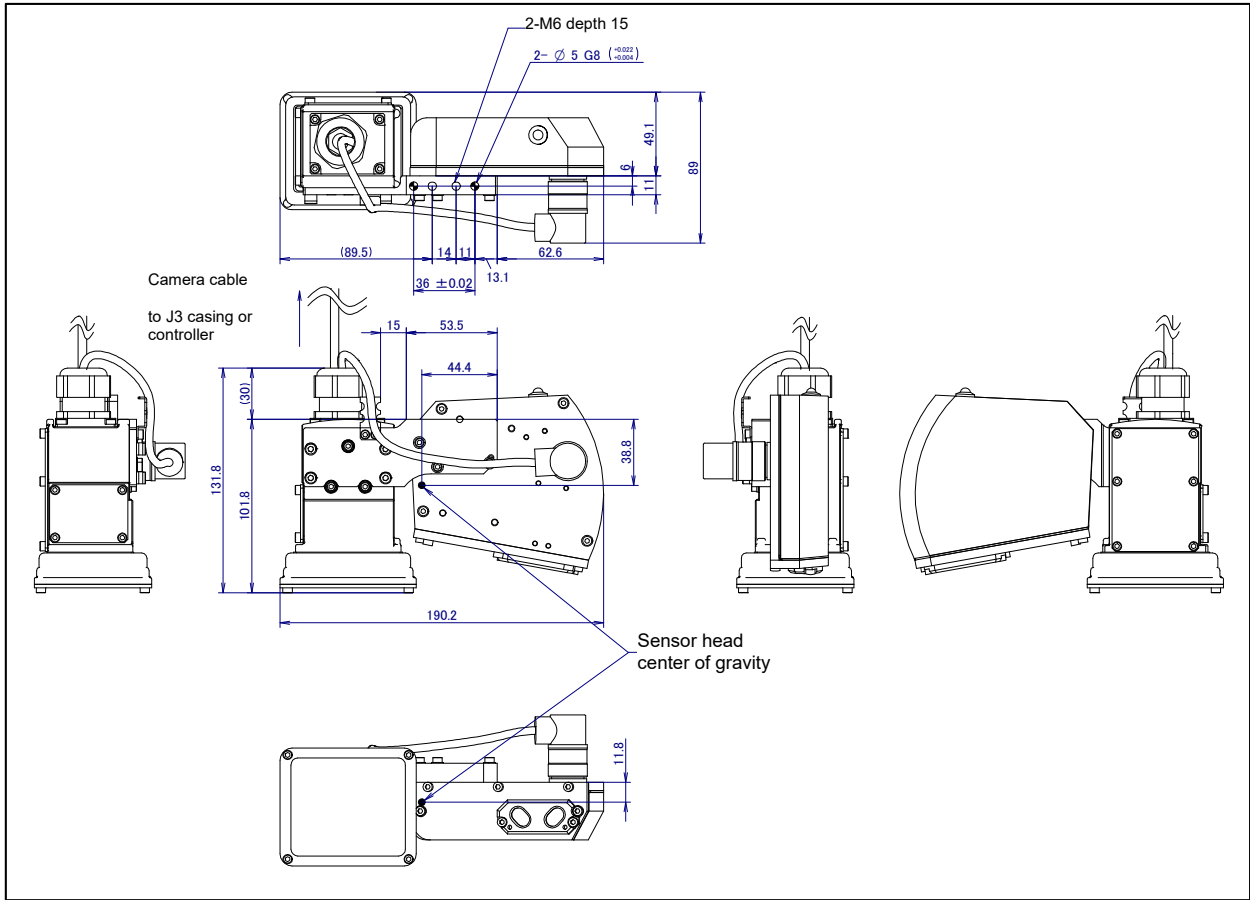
(d) External dimensions of the 3D Laser Vision Sensor Head with LED (stand off 600mm)
